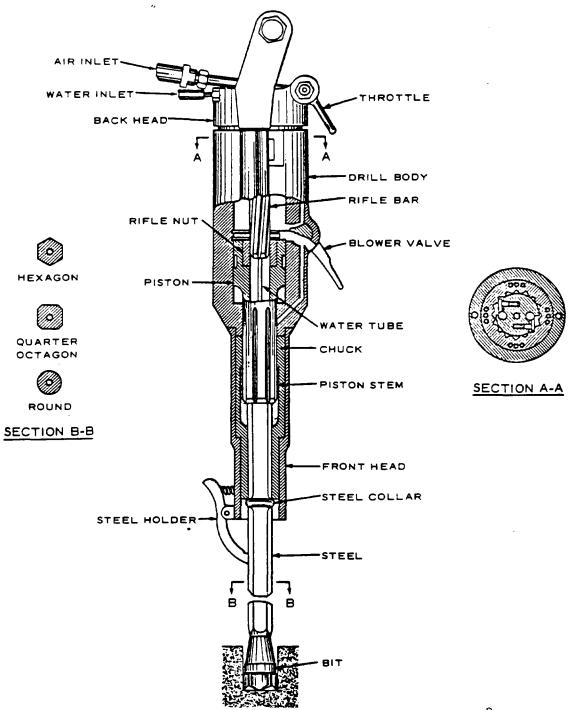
Typical surface jackhammer drill design<sup>9</sup>
